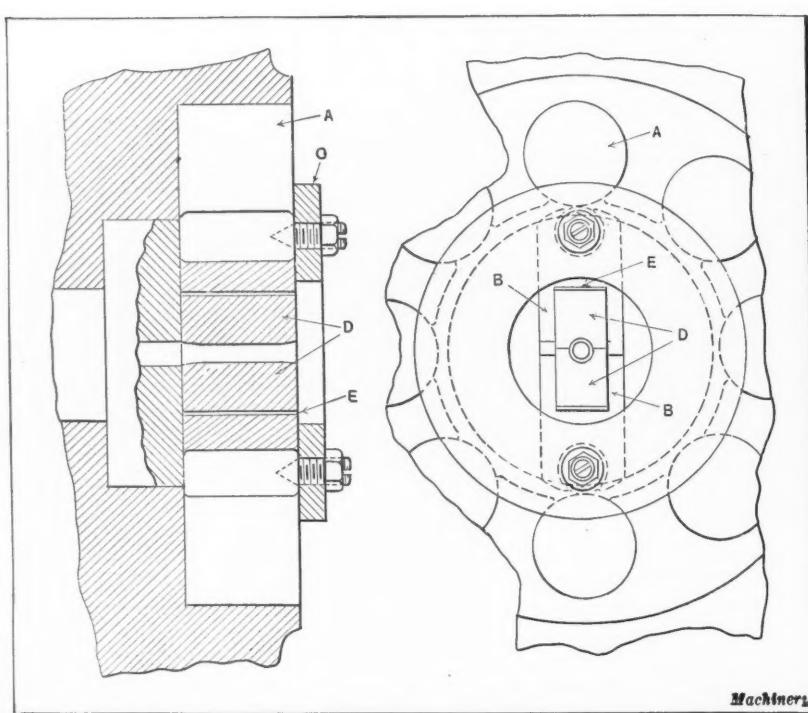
Construction of the Fixed-roll Type of Swaging Machine Head
